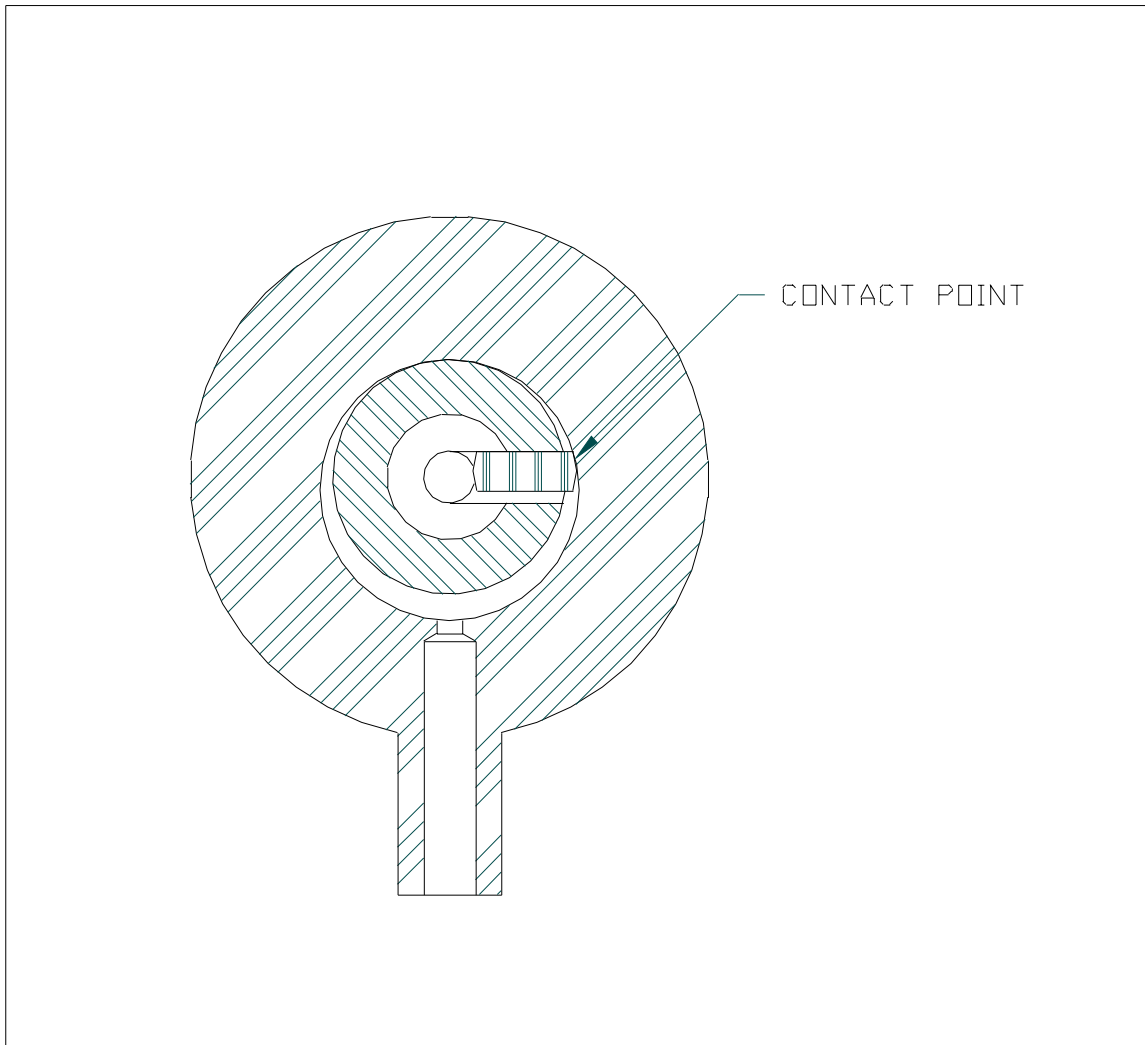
Location of Line Contact Between the Vane and the Pump Chamber.
